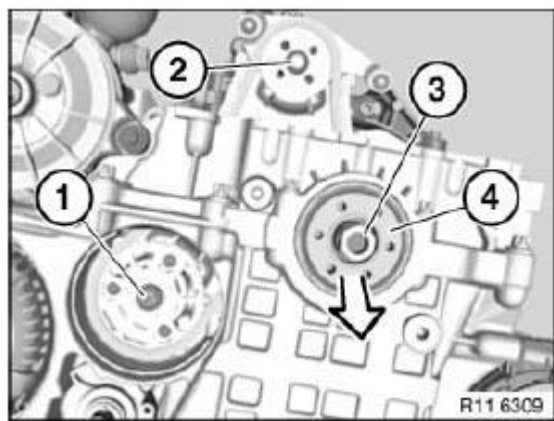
Identifying Sprocket Wheel Screws, Central Bolt And Front Hub
